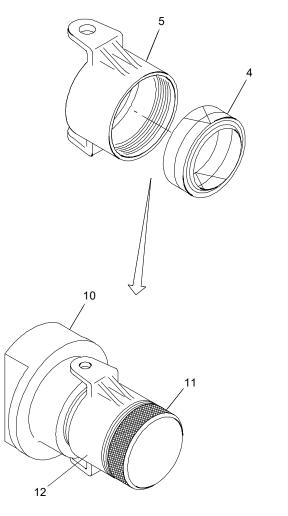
A (sheet 1 of 5). Housing, duplex bearing and slider assembly
